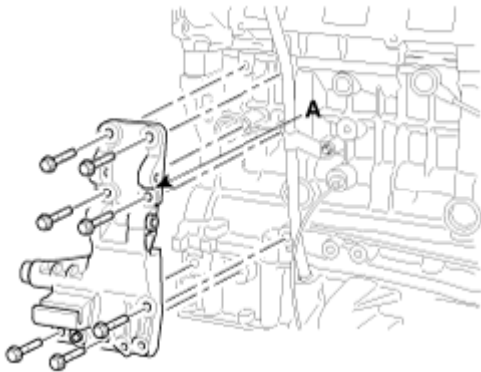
Identifying Tensioner Assembly Integrated Bracket
